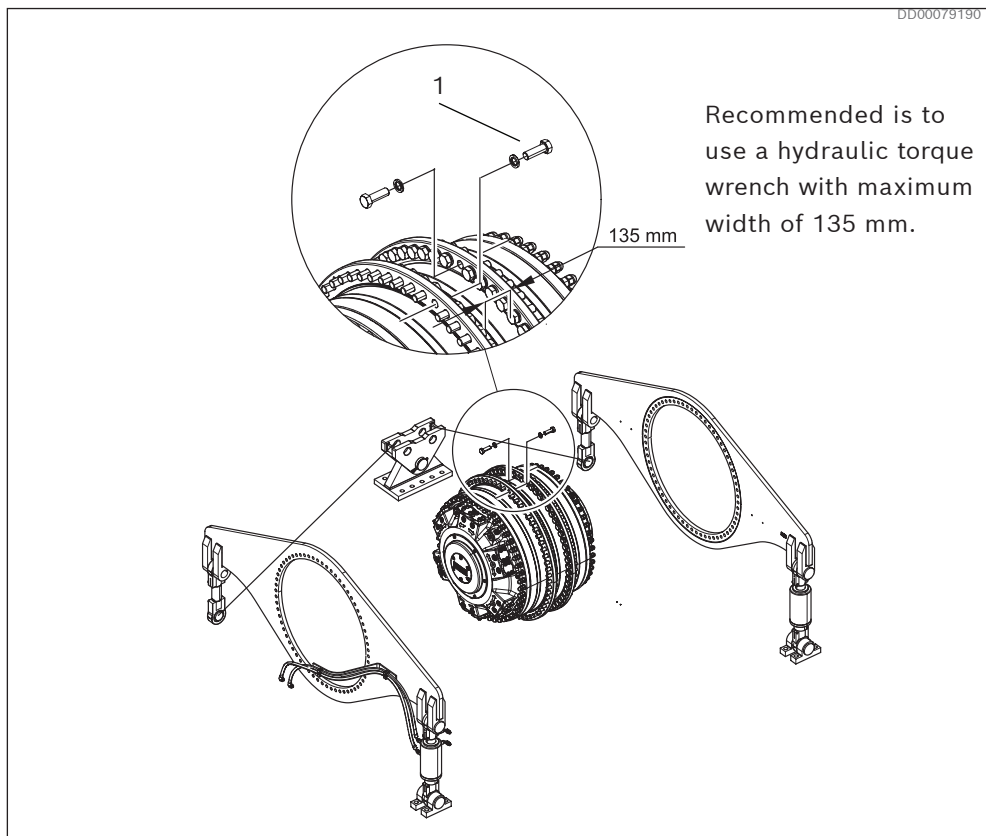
Mounting double ended torque arm DTCBM 4600 to 6000 for CBm 5000 to CBm 6000
